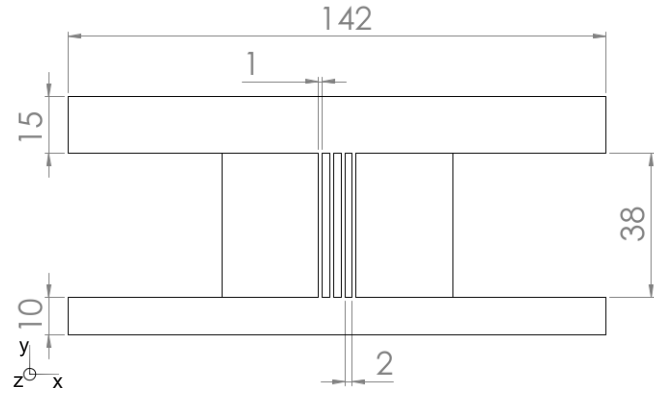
Slot burner top view technical drawing (dimensions in millimeters).
